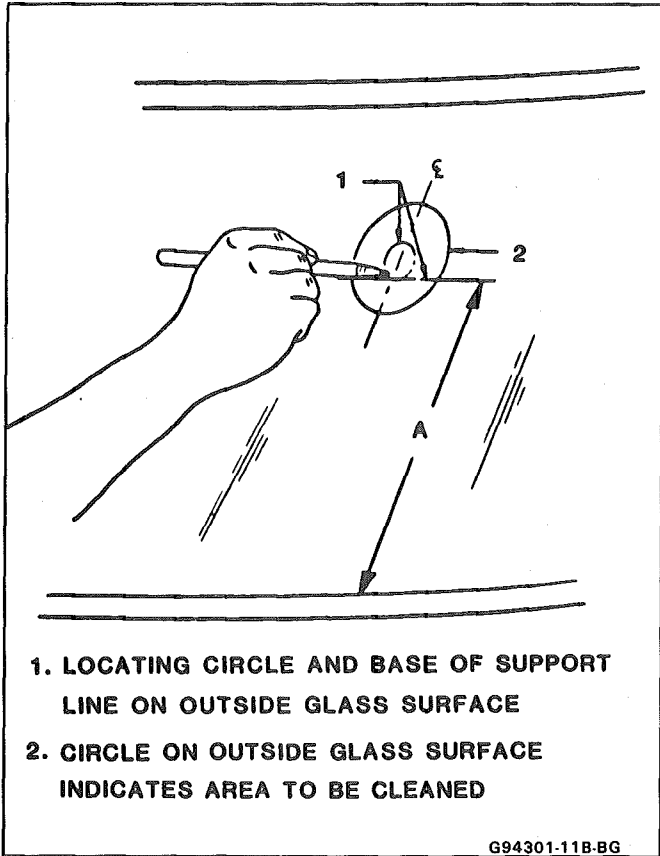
Locating Bonded Rearview Mirror Support on Glass
